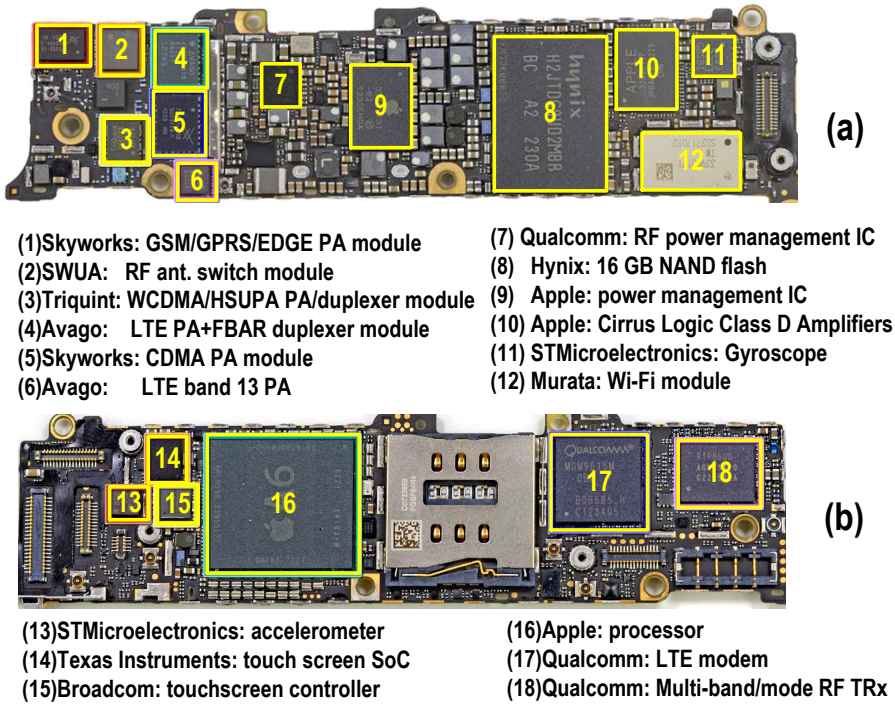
The circuit board of a modern smart phone (iphone 5) [6]: (a) The upper side of PCB (b) The lower side of PCB.
